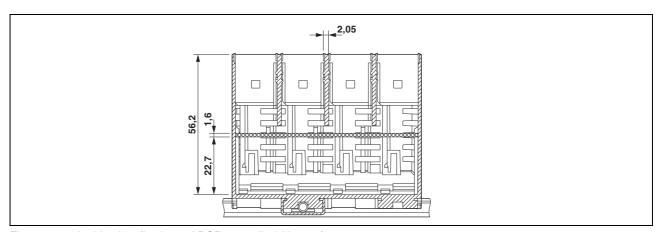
Inside view (horizontal PCB, overall width 75.2)
